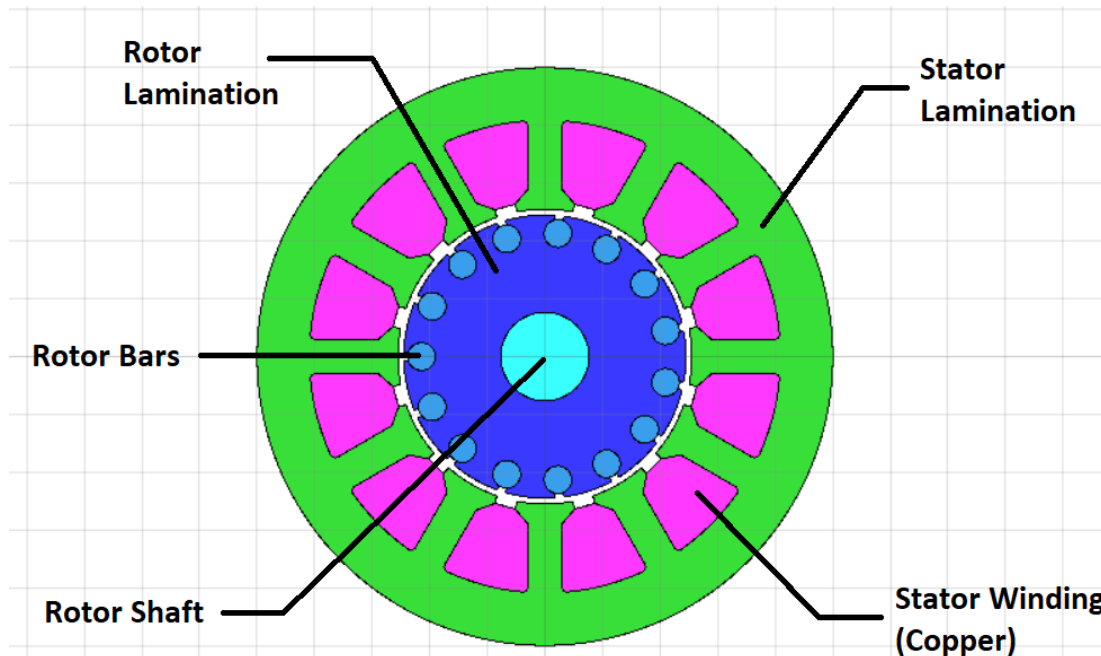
Cross-sectional view of a squirrel cage type induction machine stator and rotor.
